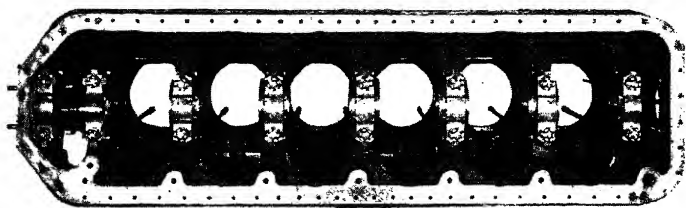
"GIPSY SIX" SERIES I AERO ENGINE.
